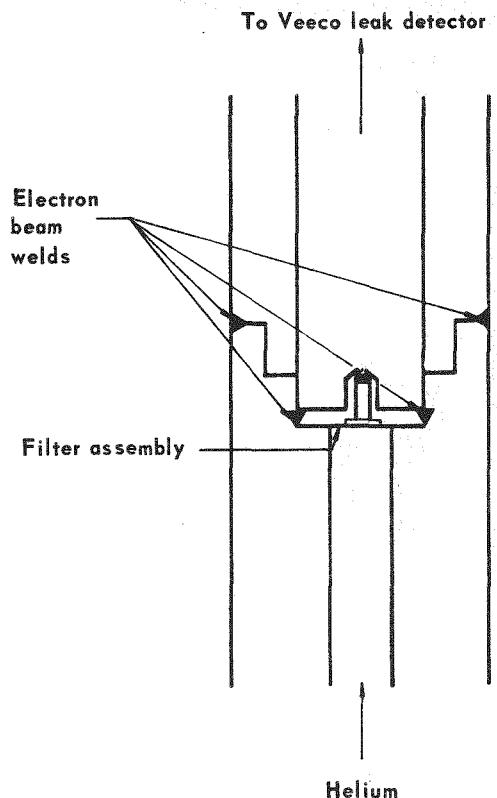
SNAP-19B (IRHS) filter assembly.
